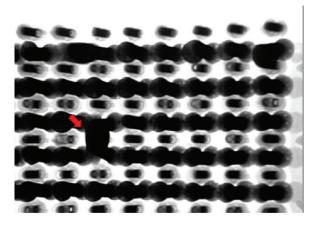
X-radiograph of CGA mounted on PCB showing solder bridge: Reject
